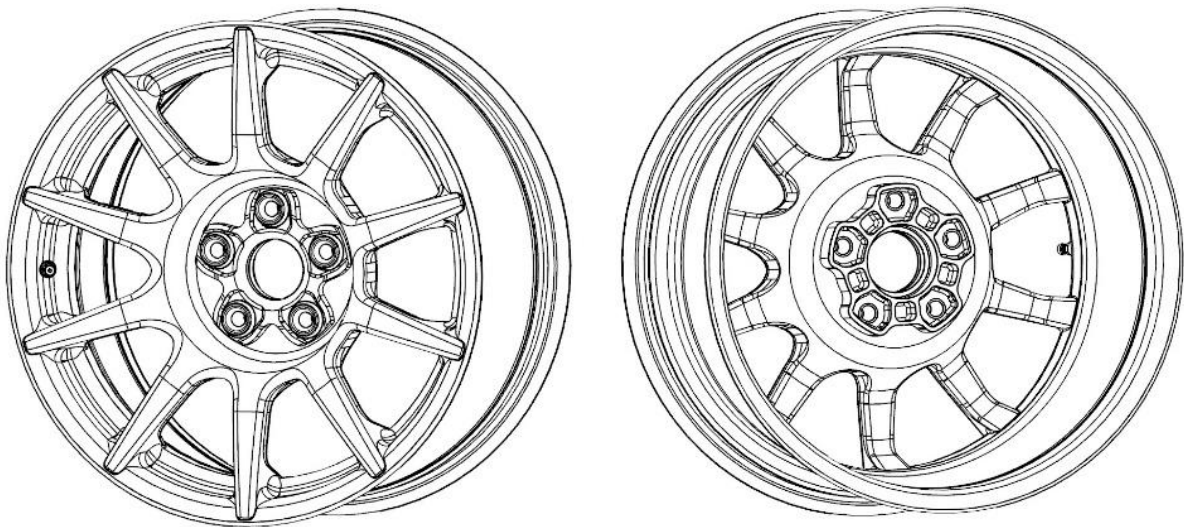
Initial prototype wheel with 3-part aluminium hubs
